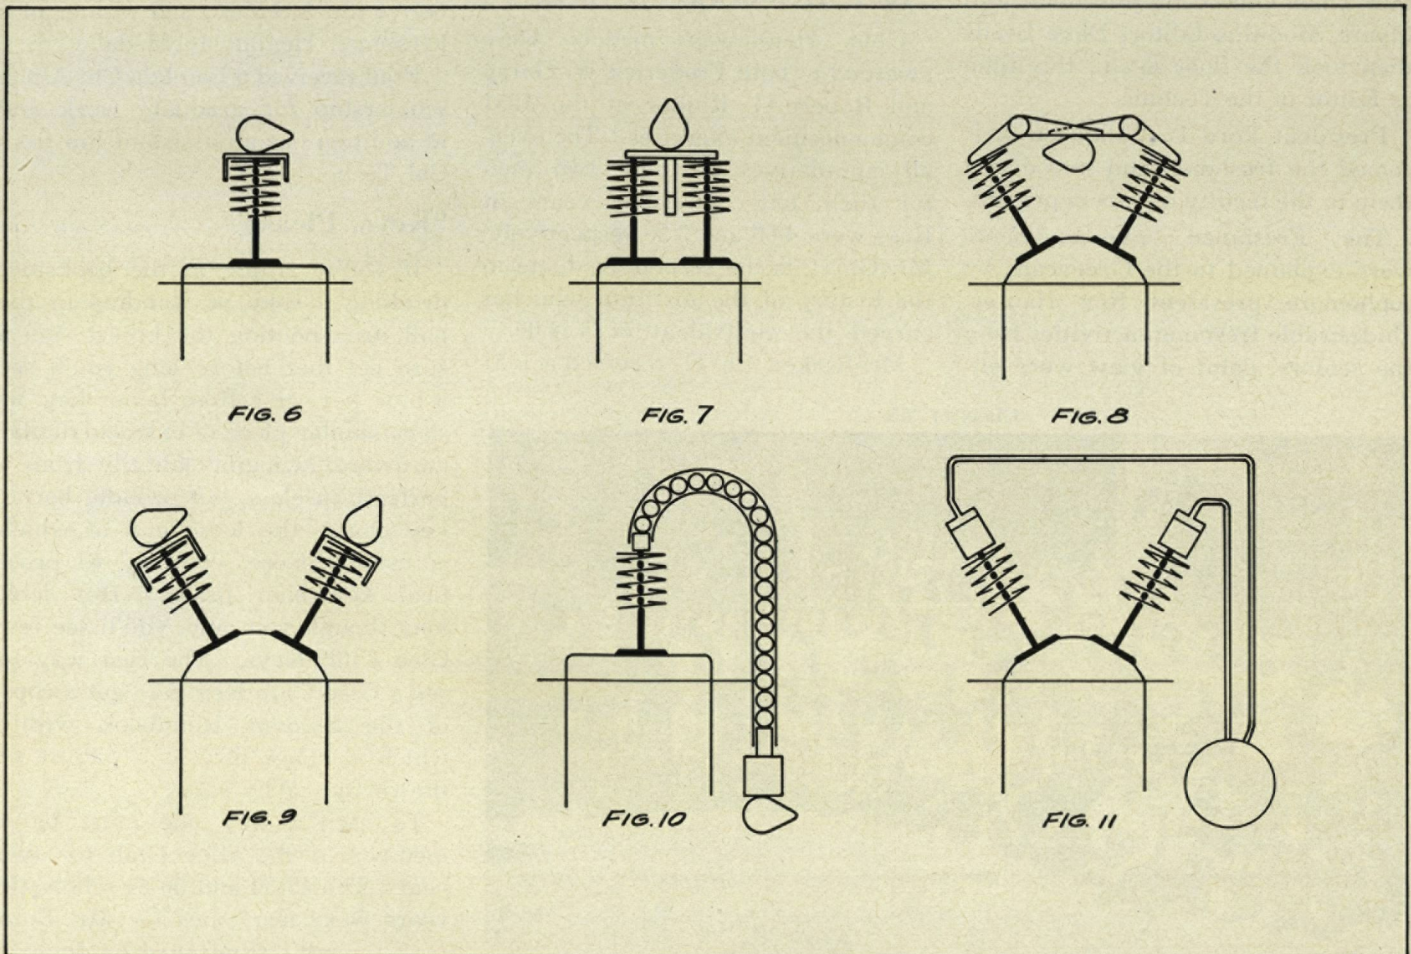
illustrates a variation of the single overhead cam system which allows the use of multiple valves. This particular arrangement was seen on a 91 cubic inch engine (believed to be a Miller) built for racing purposes. It was a four-cylinder model with 16 valves, two valves actuated by a "T" bar which was depressed directly by the lobes on the camshaft.
